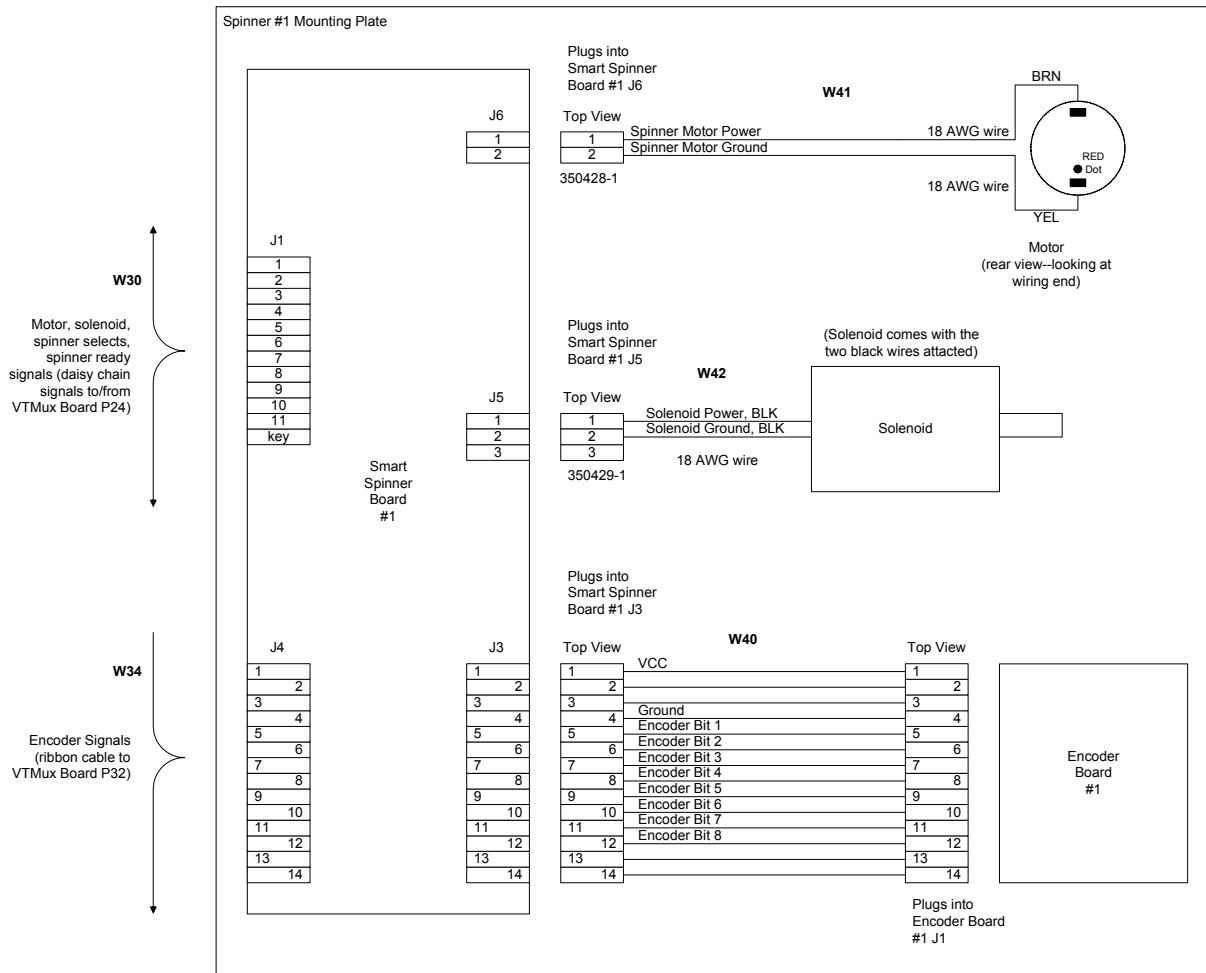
SPINNER #1 SUBASSEMBLY
